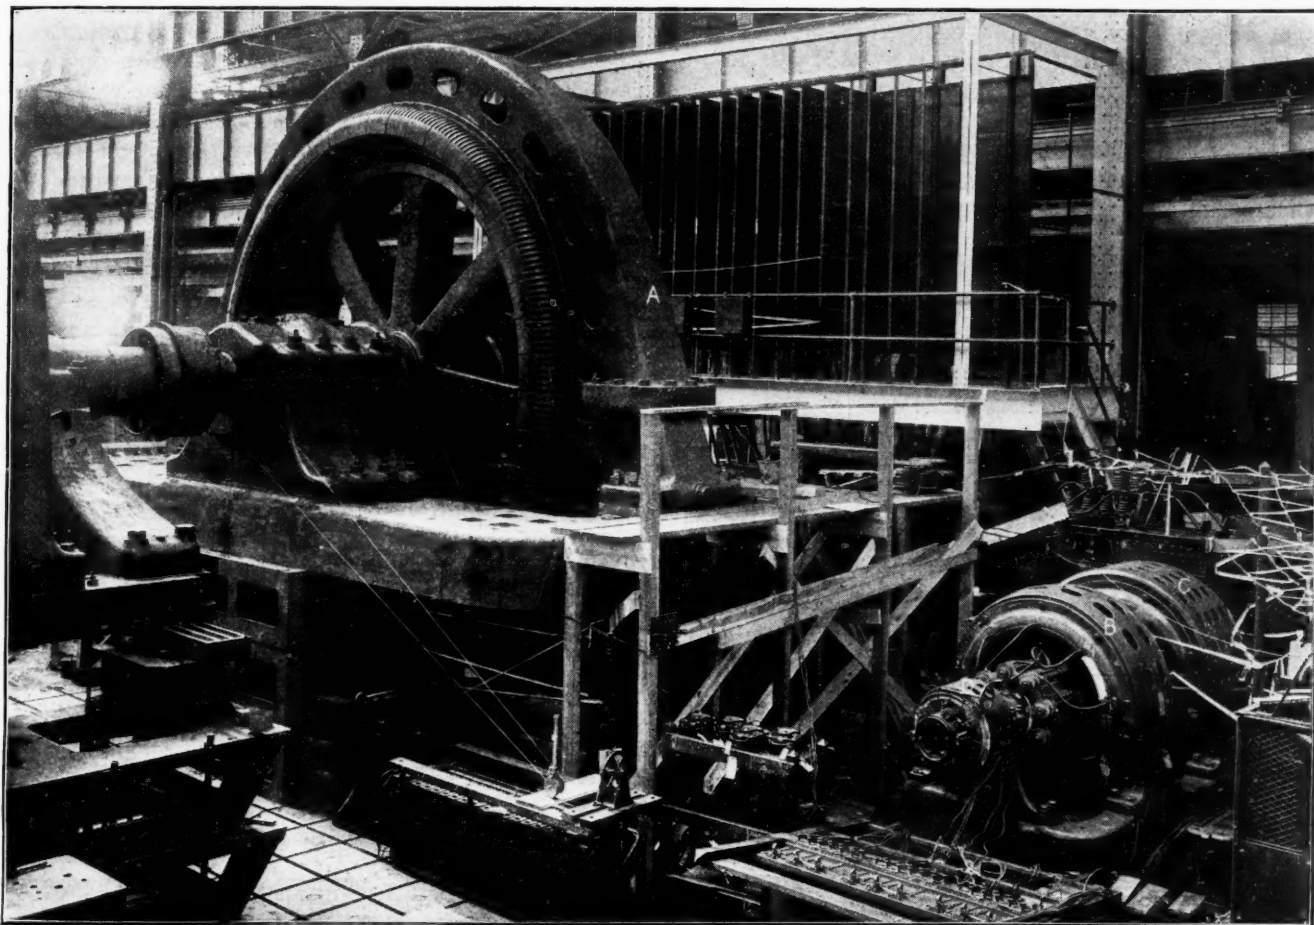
TESTING A 2000-HP. MOTOR AND REGULATING SET
